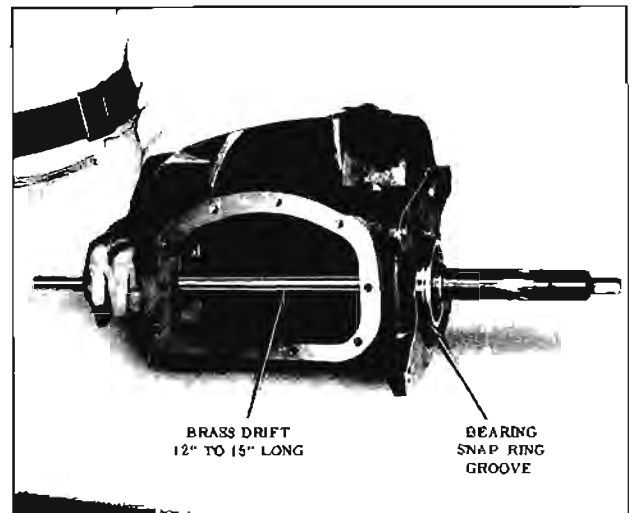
Positioning Main Drive Gear Bearing in Case
